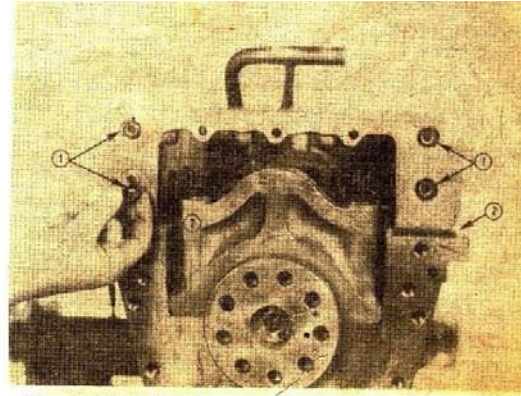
, Install the pan adapter to the flywheel housing seats
